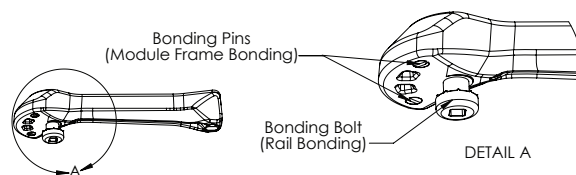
Example CAMO clamp, a type of rear flange mounted clamping hardware. Clamp slides into the rail channel and the bonding pins contact the rear module flange. CAMO hidden end clamp. Clamp slide into rail channel and the bonding pins contacts the module flange edge.
